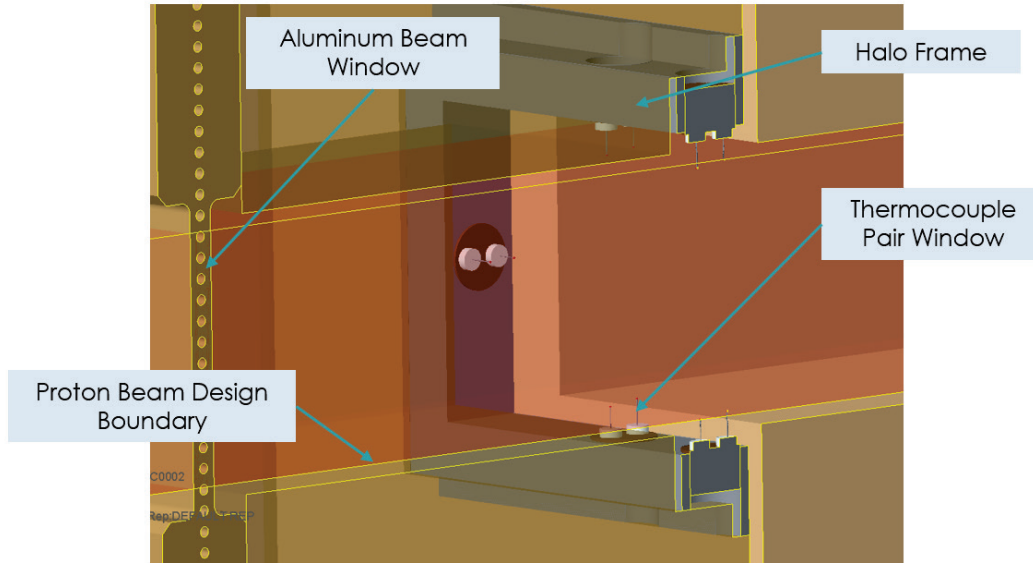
Beam halo monitor as mounted in the PBW assembly.
